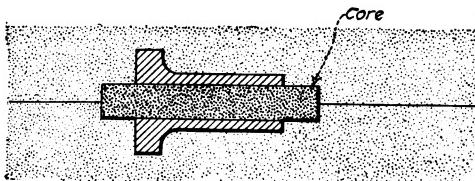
A print left by a cored pattern with the core in place ready for casting
